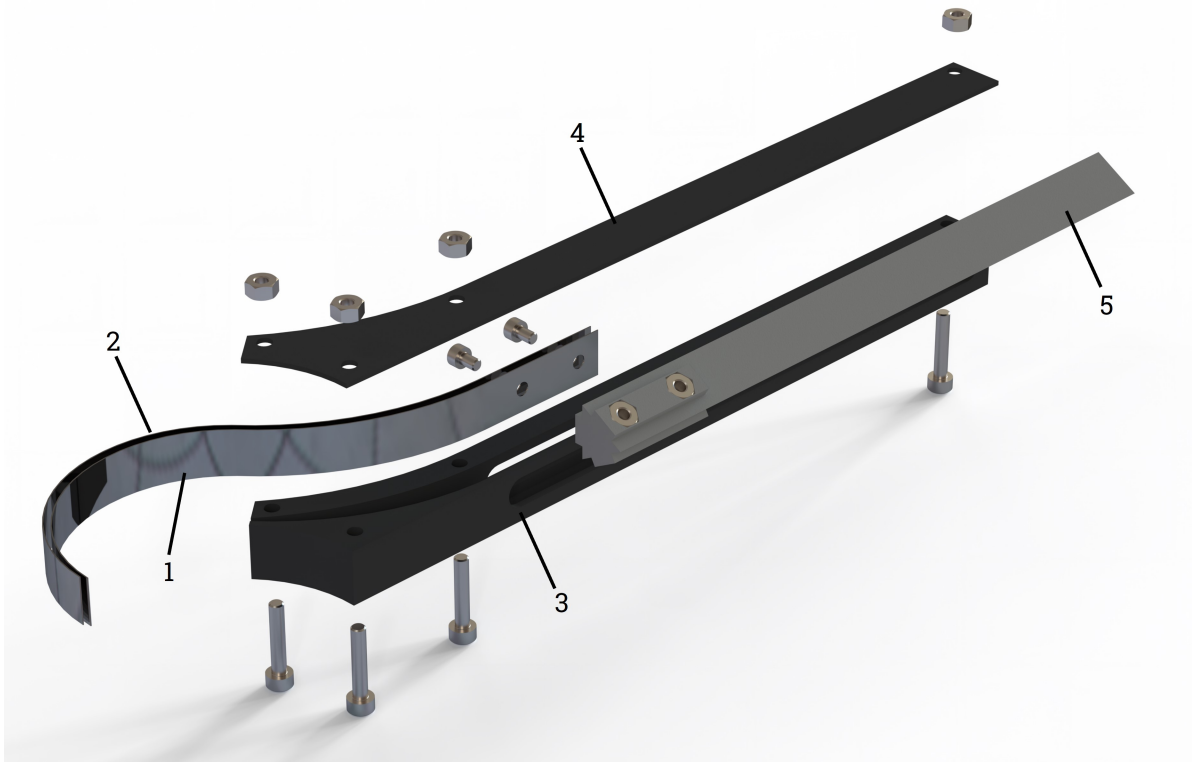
An exploded view of the design of a single finger with the triangular mounting part: the design consists of an inner backbone (1) and outer backbone (2), housed in a 3D-printed PLA guiding hub (3) that is closed of with a plate (4). The backbones are mounting to the triangular mounting hub (5).
